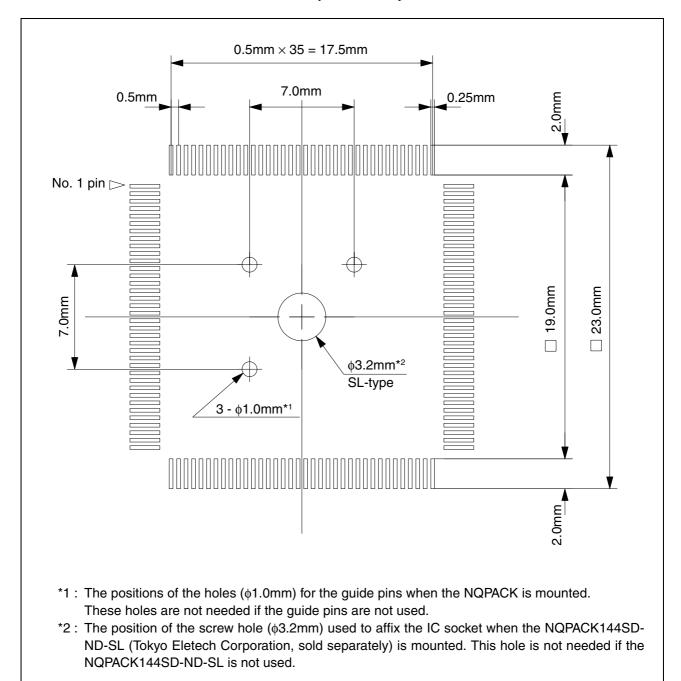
Recommended dimensions of the footprint for mounting the NQPACK
